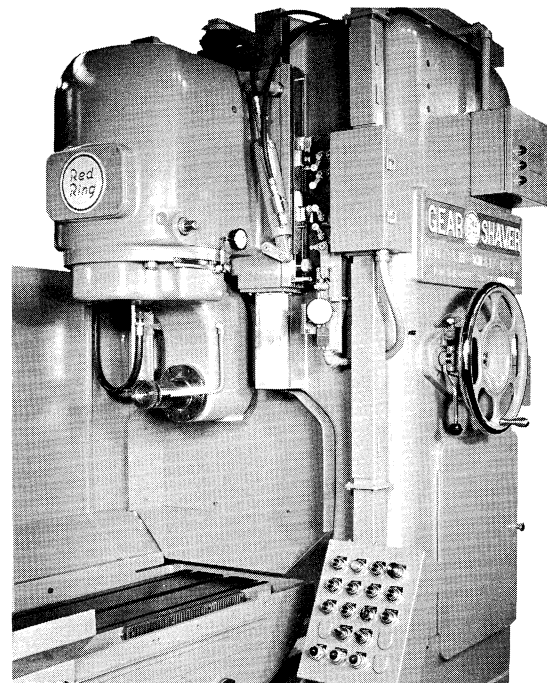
An internal cutter head attachment on a Model GCX Red Ring gear shaver.
